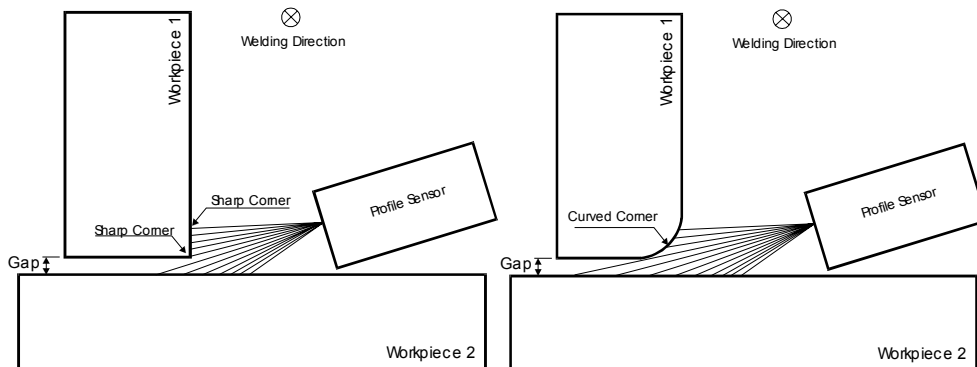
Configuration of laser sensor during measurement of flange-joints. In the figure to the left, workpiece 1 has a sharp corner at the weld joint. In the figure to the right, workpiece 1 has a curved corner towards the weld joint.
